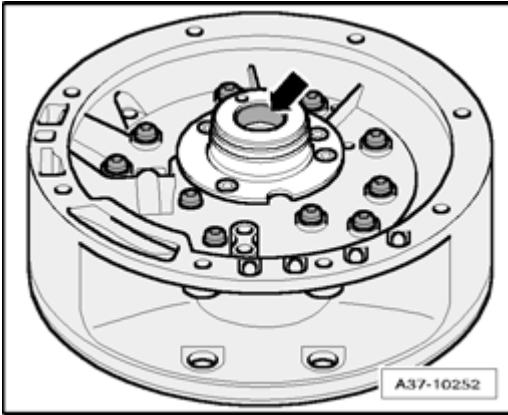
Contact Surfaces Of Brass Sleeve At Inside Of Shaft
